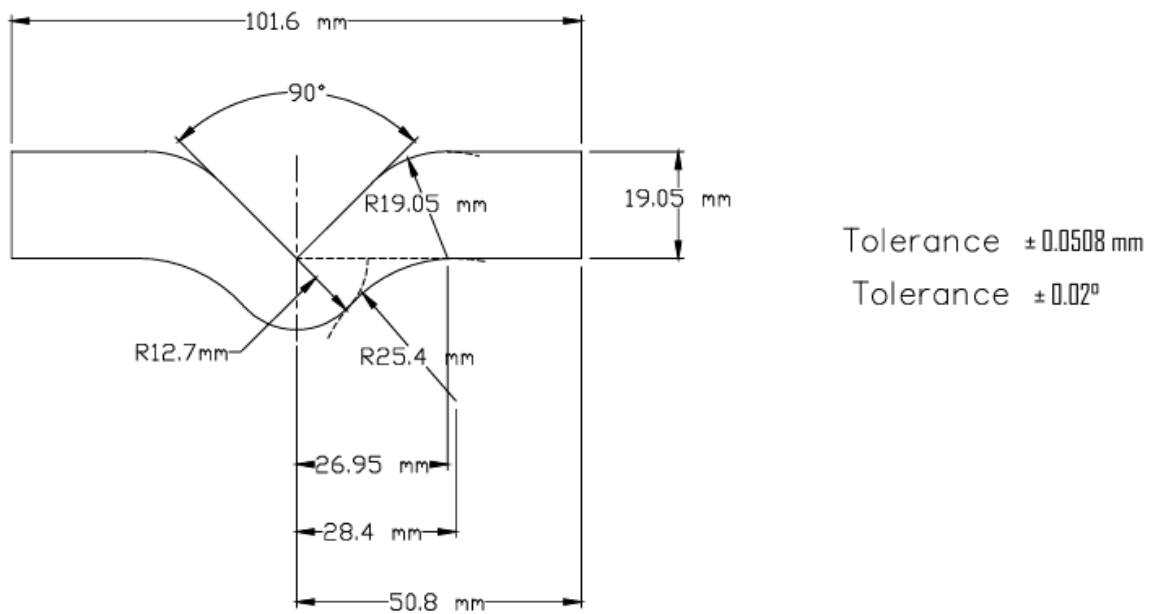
DIE FOR TEAR TEST SPECIMEN
